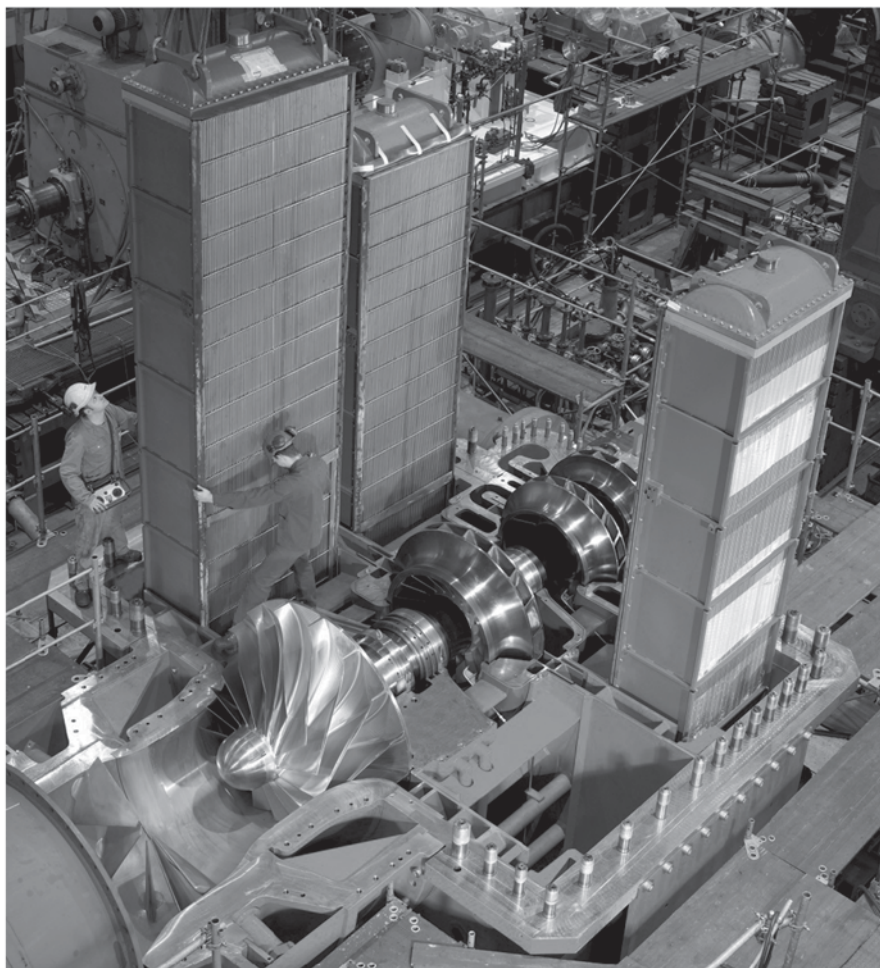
Radial air compressor with integrated coolers (courtesy MAN Diesel & Turbo)
